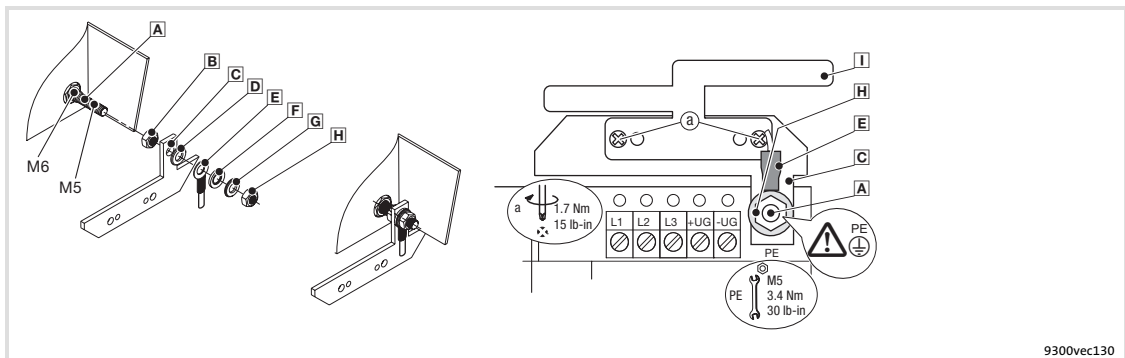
Installation of shield sheet for drive controllers 0.37 ... 11 kW
